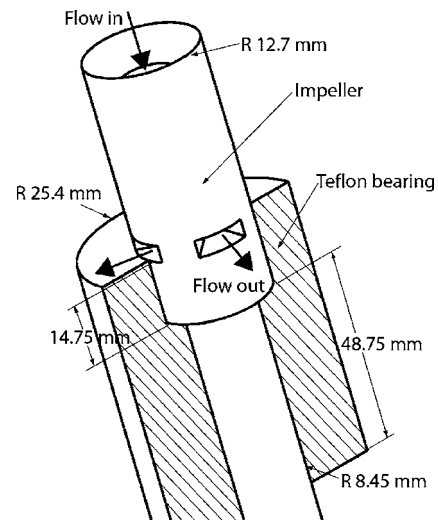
Impeller and cross section of bottom bearing showing the arrangement employed to eliminate leakage
